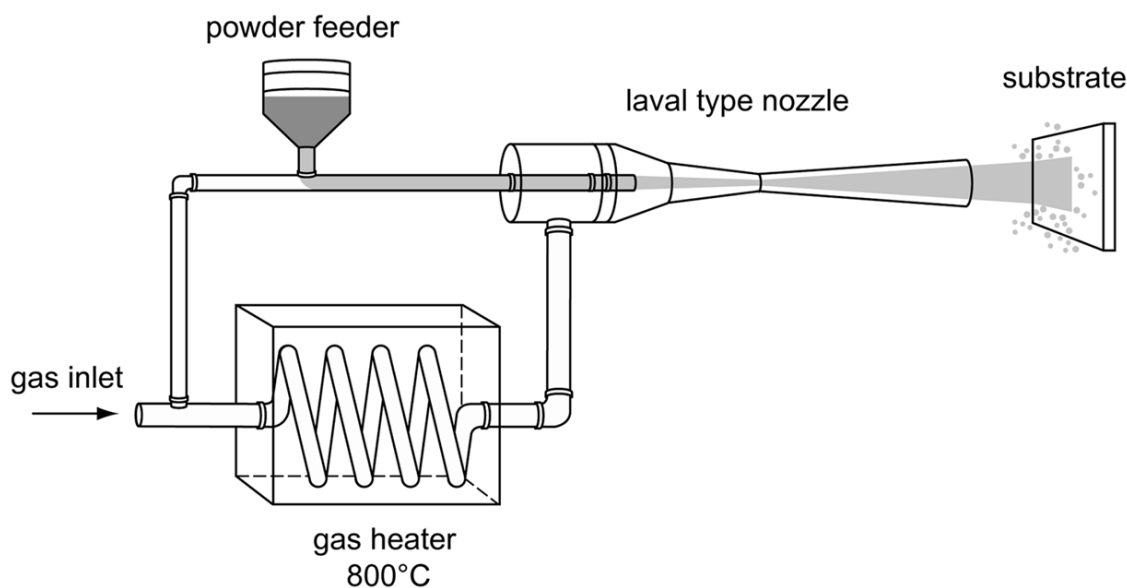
Conceptual drawing of the cold spray equipment and process [18]
